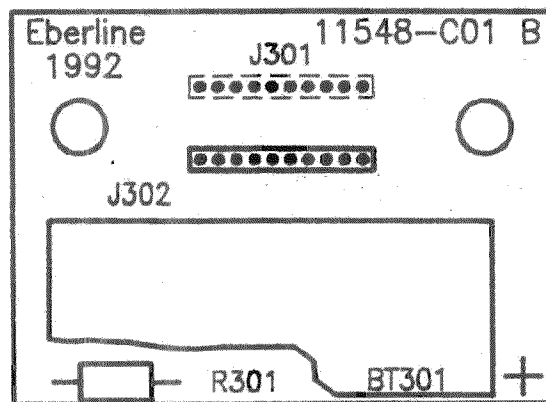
Connector/Battery Board Component Layout, 11548-C03
